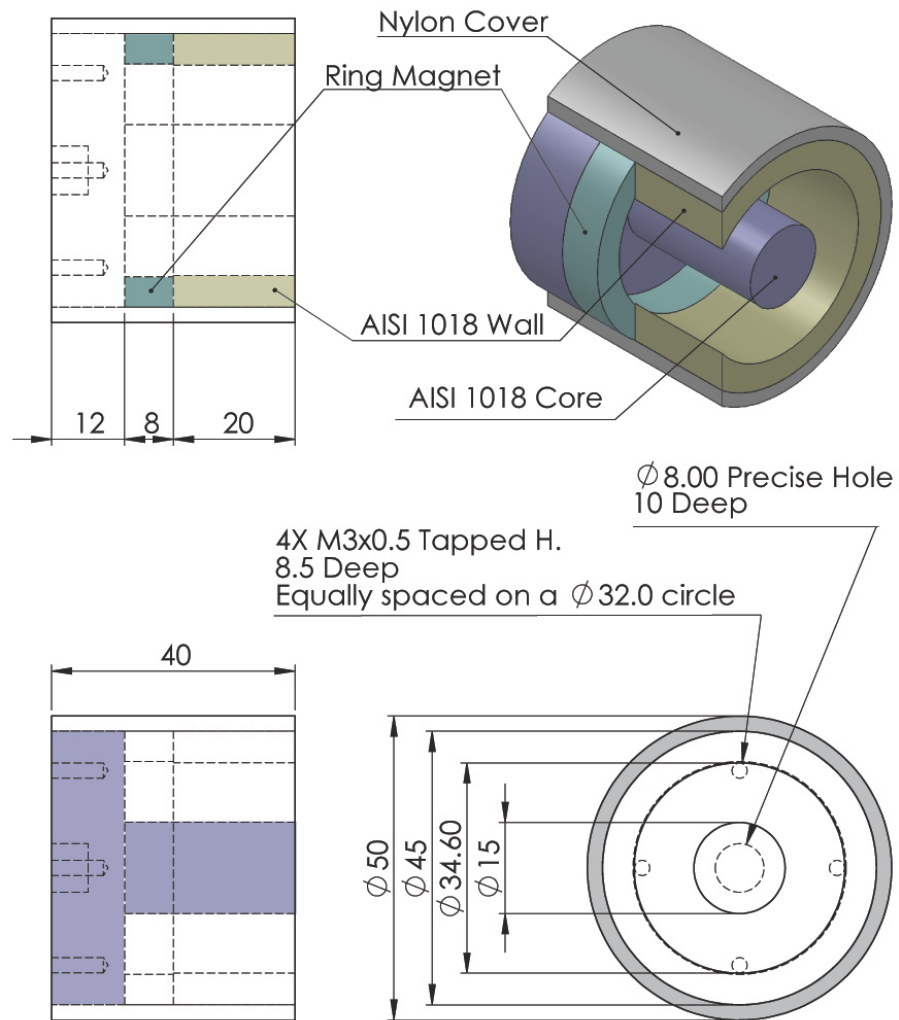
VCA core assembly. Dimensions in [mm].
